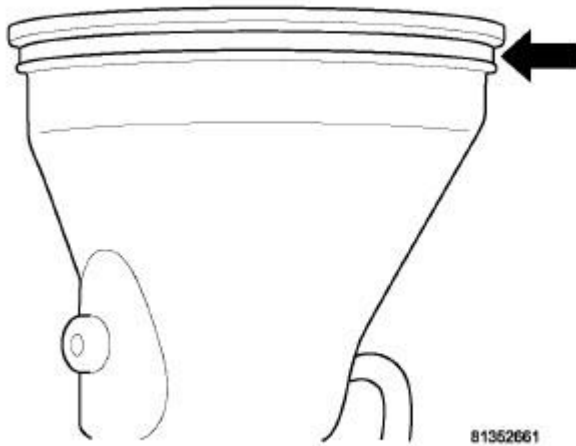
Identifying Groove In Filler Tube Rubber Profile
